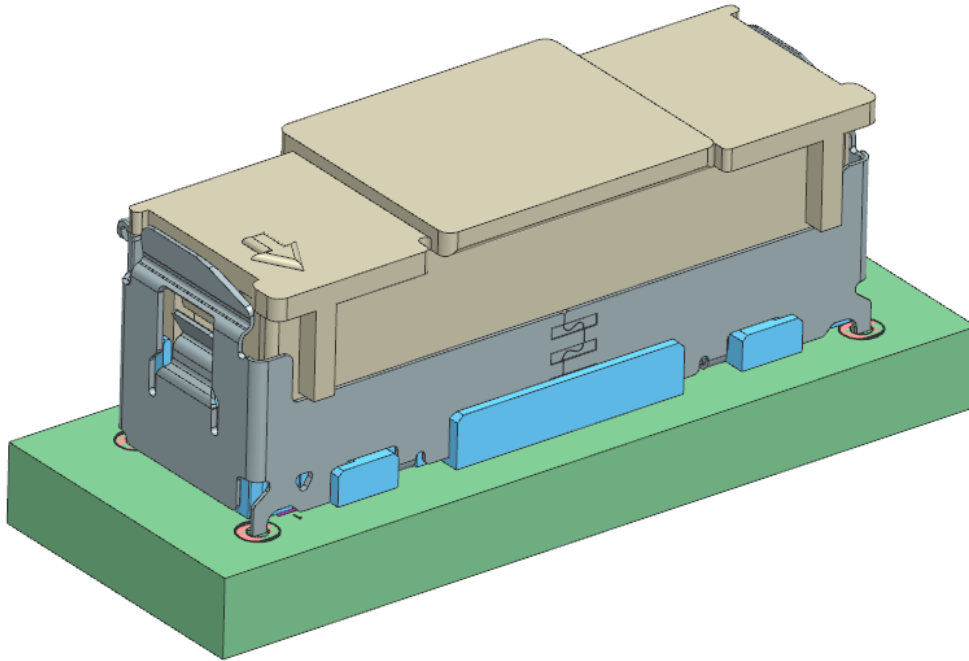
Fixed-Side Connector with Vacuum Cap
